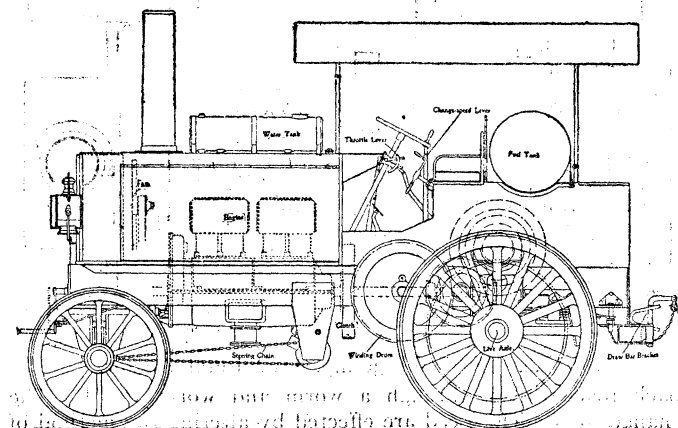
45 h.p. Thornycroft Military Oil Tractor. The engine drives a water-ballast roller through the medium of a clutch, a simple form of change-speed gear-box, and a single roller chain. The leading roller, by which steering is effected, is also filled with water, in order to obtain the dead weight necessary for rolling. Marshall, Sons & Co., Ltd., of Gainsborough, Thornycroft, of Basingstoke, and Broom & Wade, of High Wycombe, have also produced special machines for agricultural and military purposes, and one of the smallest tractors built by the first-named maker is shown in fig. 36. The engine is one of the two-cylinder type, consuming paraffin fuel, and driving the live back axle through a substantial gear-box and a final drive of the externally-toothed type. Such a machine is well below the weight limit for heavy motor-cars. Fig. 37 shows a more powerful oil tractor by Thornycroft. This machine is the same type which was so successful in the tractor trials promoted by the British War Department in March 1900. It is capable of hauling a gross load of seven tons practically
